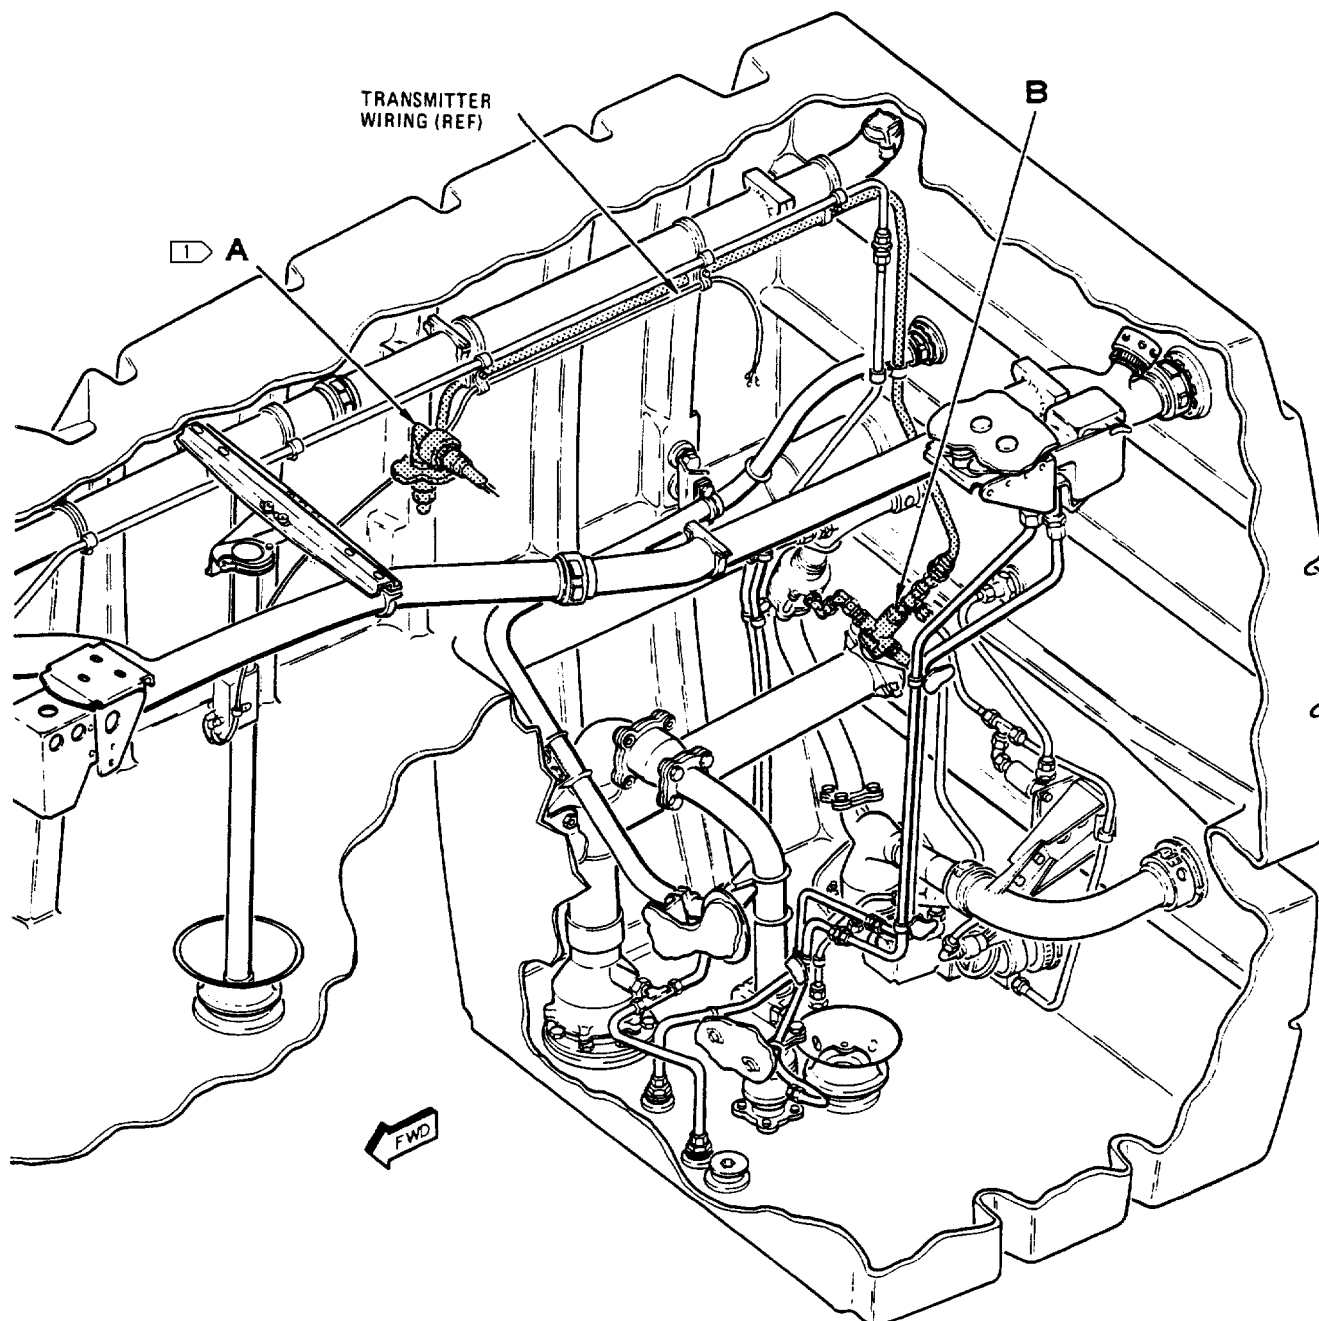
No. 1 Fuel Tank Transfer Control Valve (5L-F160) (Sheet 1)
